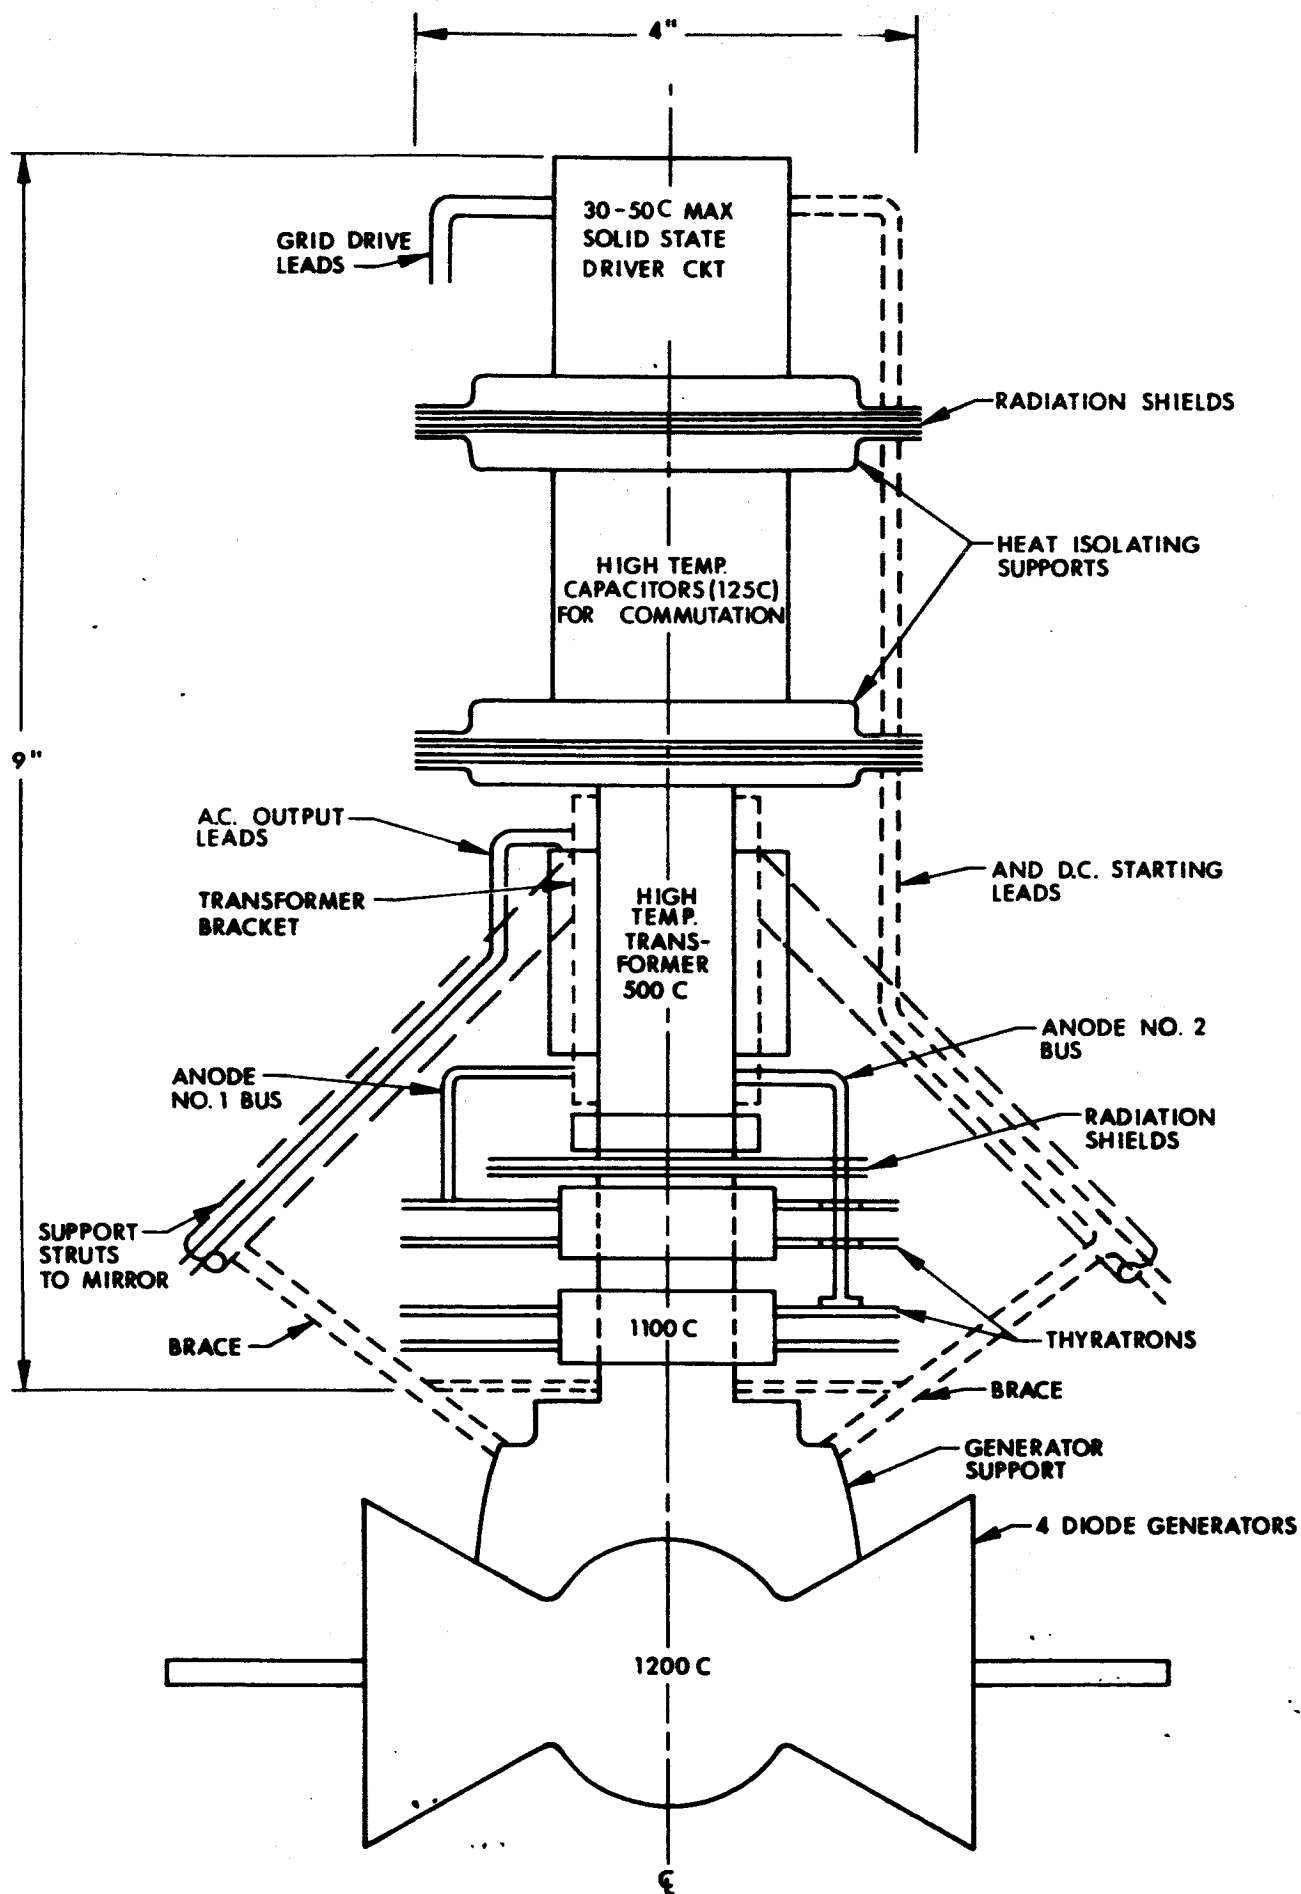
POWER CONDITIONING SYSTEM - INTEGRATED TUBE
